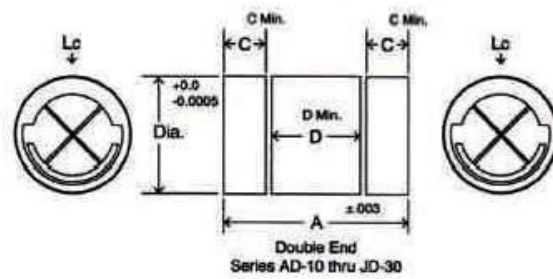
C-Flex Double End Frictionless Bearing. The GD-10 bearings used for the force balance were custom ordered with all load bearing surfaces of equal width, i.e  $C = D$  in the figure (The Bearing Solution, 2010).
